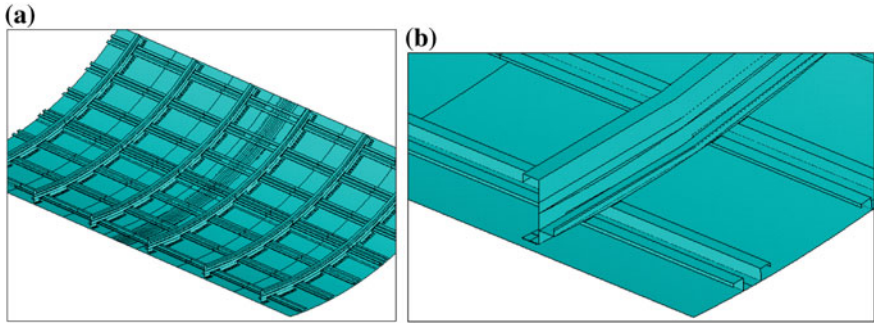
a Curved panel considered for analysis; b assembly showing frame, stringer, and skin panel
